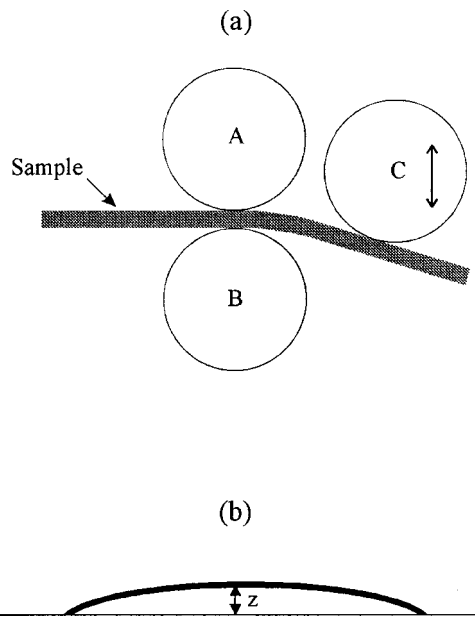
(a) roller configuration in the bending apparatus (cross section), (b) cross section after bending with parameter z indicated.
